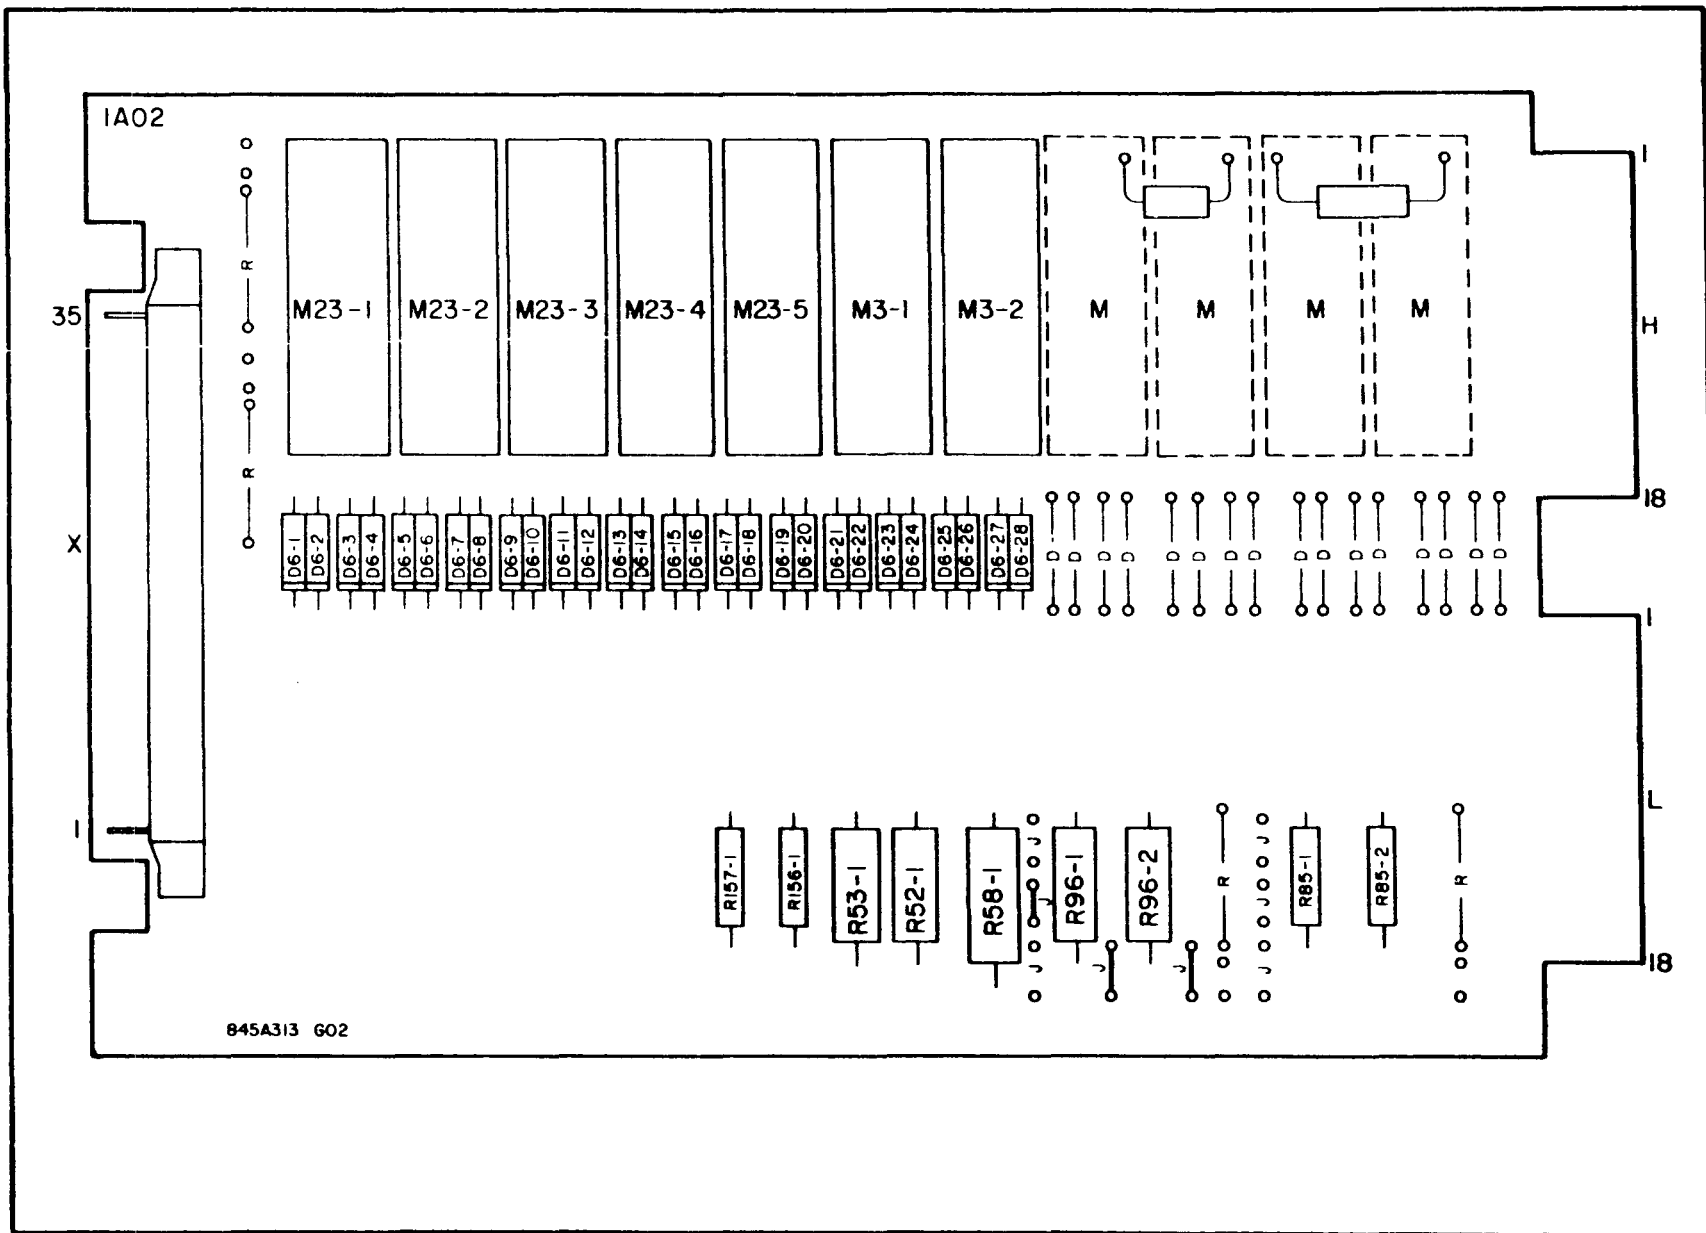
IA02 ASSEMBLY (REF. DWG. 845A313, SUB 3)
